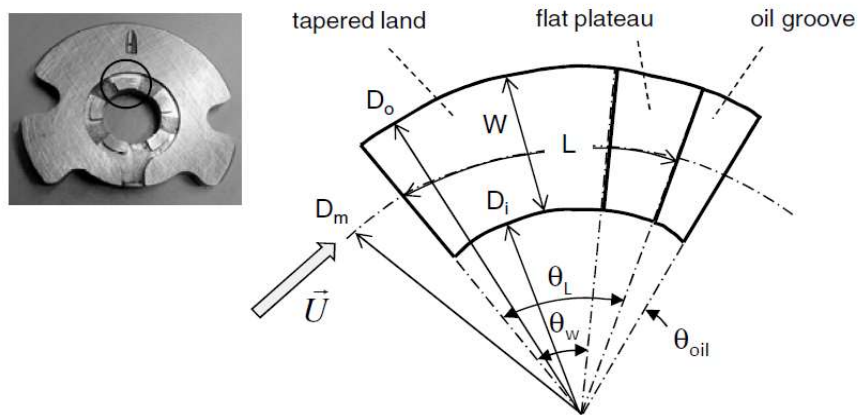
Thrust bearing design (Nguyen-Schäfer, 2012)
